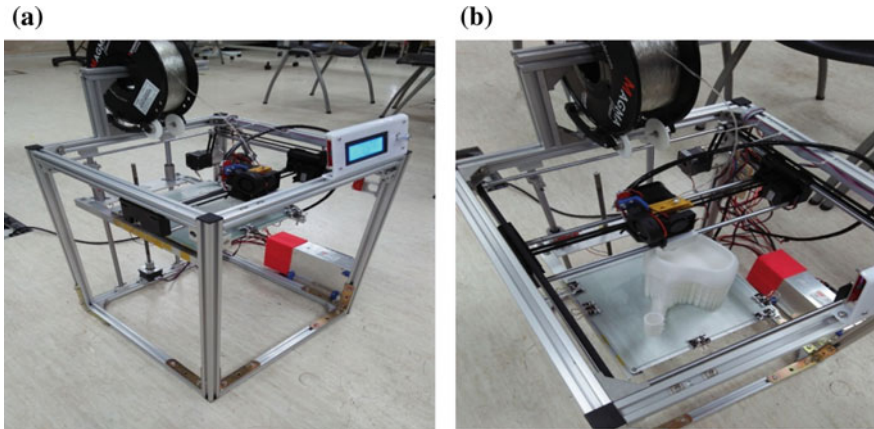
a The setup of 3D printer. b 3D printing in progress
